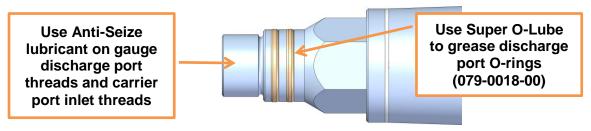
Apply anti-seize to threads and Super O-Lube to O-rings.
